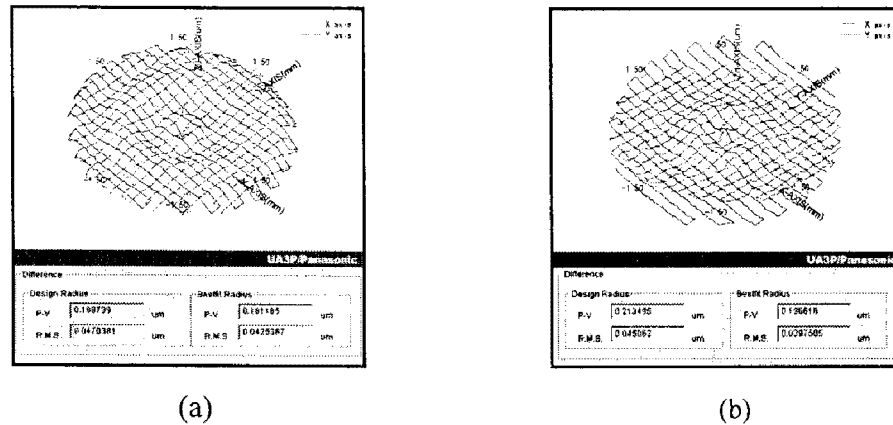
Form accuracy (PV) of the aspheric surfaces of: (a) the mold and (b) the lens molded.
